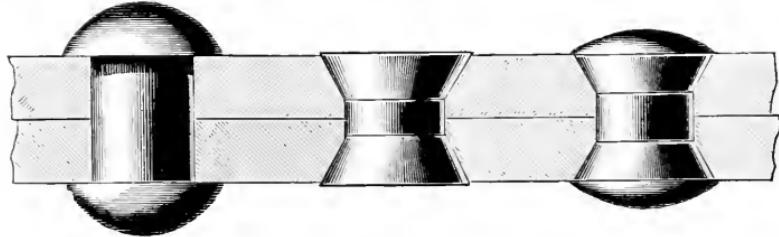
RIVETS WITH MACHINE-MADE HEADS.
